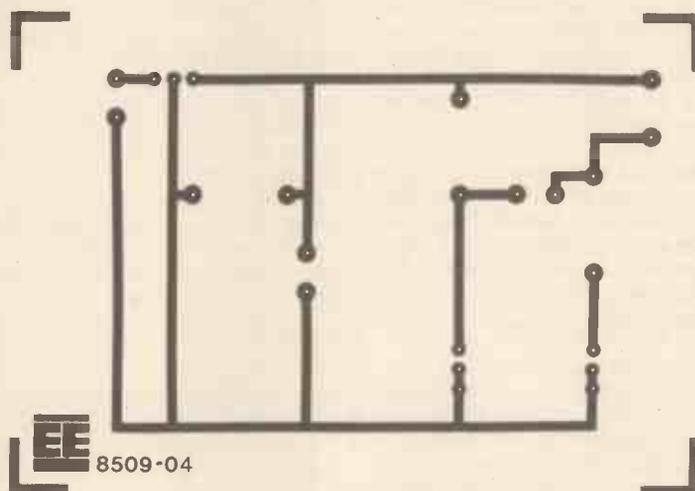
Full size printed circuit board master for the Semiconductor Temperature Sensor. This board is available from the *EE PCB Service*, order code: 8509-04.
